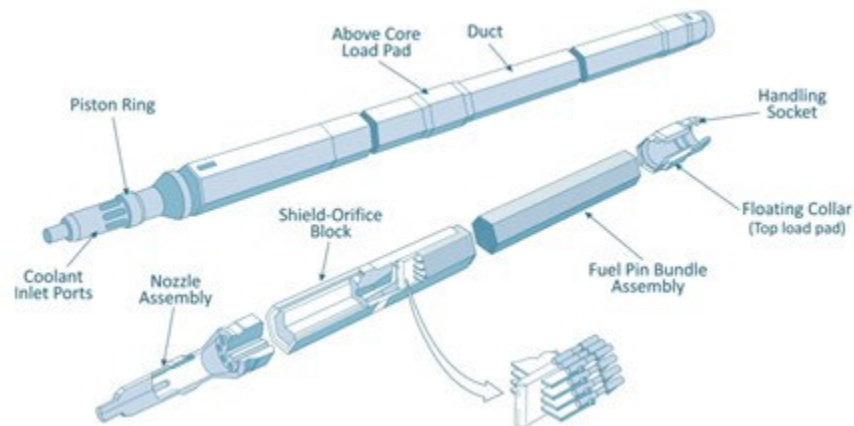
Schematic of ARC-100 fuel assembly design [10].
